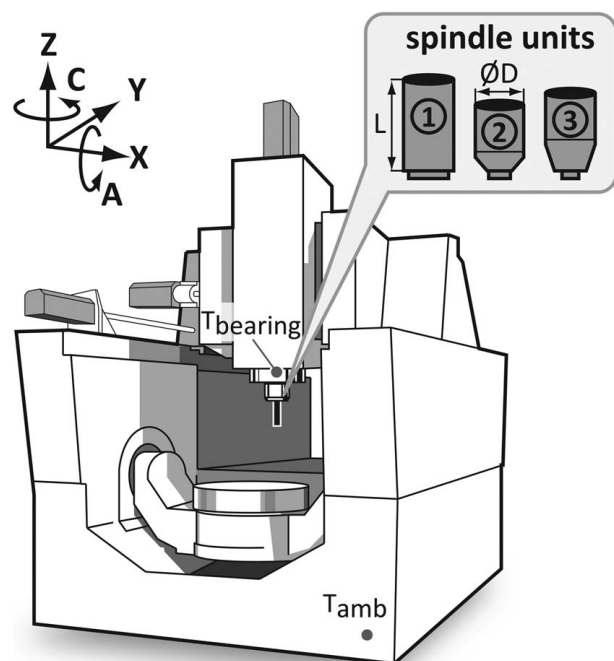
Gantry-type five-axis CNC machining center equipped with different motorized spindle units (SP1, SP2, and SP3)
